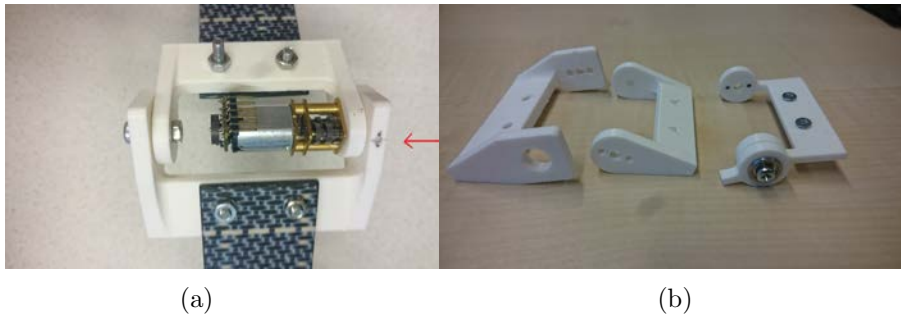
(a) motor placed inside the joint, the arrow indicates the point where the motor shaft is fixed to the joint.(b) on the left new design of the joint parts, on the right the old design.
